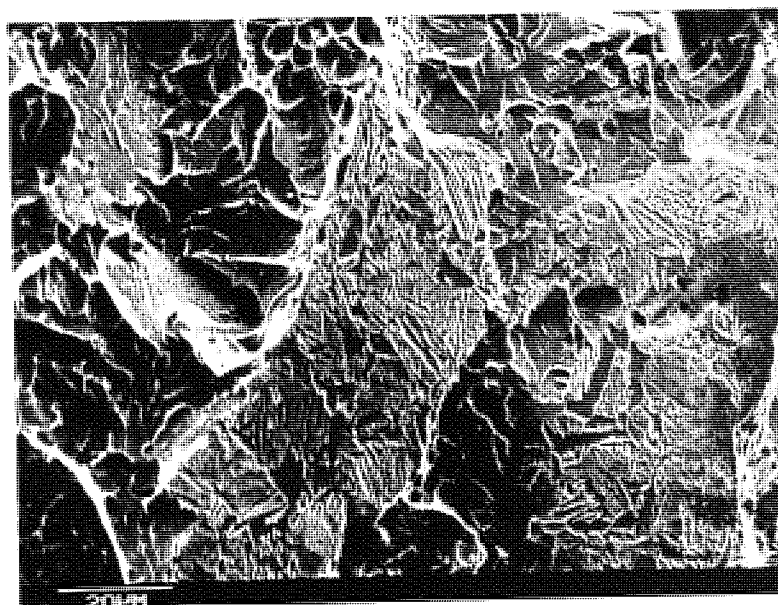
, Fracture surfaces of tensile test piece of 635Al4,
